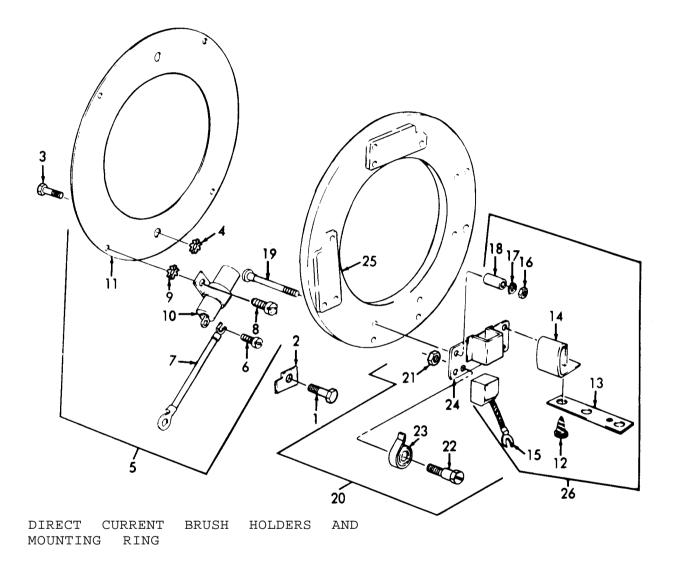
Dynamotor-Welder Frames, Field Coils, Pole Shoes, Brush Holders, and Mounting Rings, Exploded View (Sheet 2 of 3). LEGEND FOR FIGURE 13-9 (Sheet 2 of 3):
